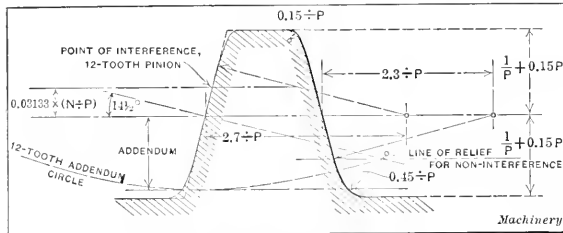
Hob Tooth designed to generate the Approximate Shape of a 14 1/2-degree Involute Milled Tooth
